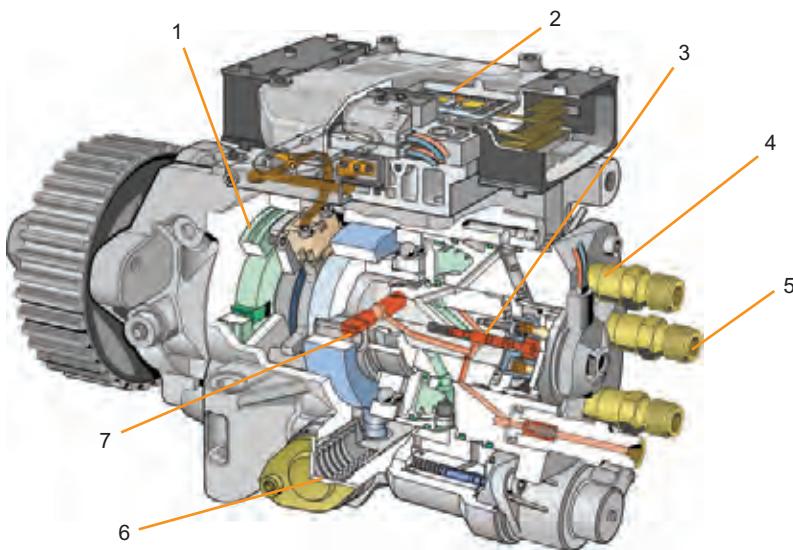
Solenoid-valve controlled radial-piston distributor pump: 1– sensor (position/timing); 2 – ECU; 3 – high-pressure solenoid valve needle; 4 – solenoid; 5 – outlets to injectors; 6 – timing device (ignition advance mechanism); 7 – radial-piston high-pressure pump
